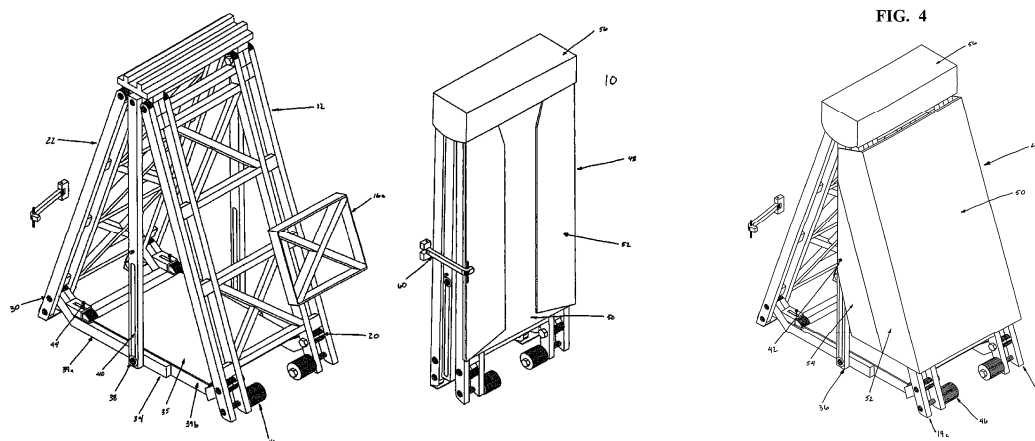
Drawings illustrating parts and assembly of mechanical device. From U.S. Patent 7,464,502 to Sardi Herrera (Colombian inventor) for Modular Folding Shelter.
